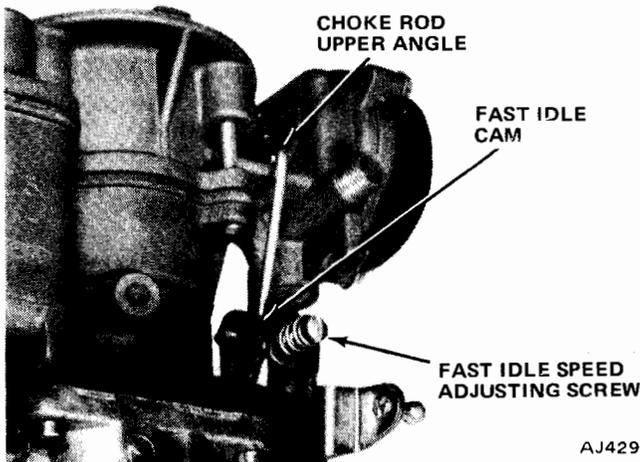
Fast Idle Cam Linkage Adjustment
